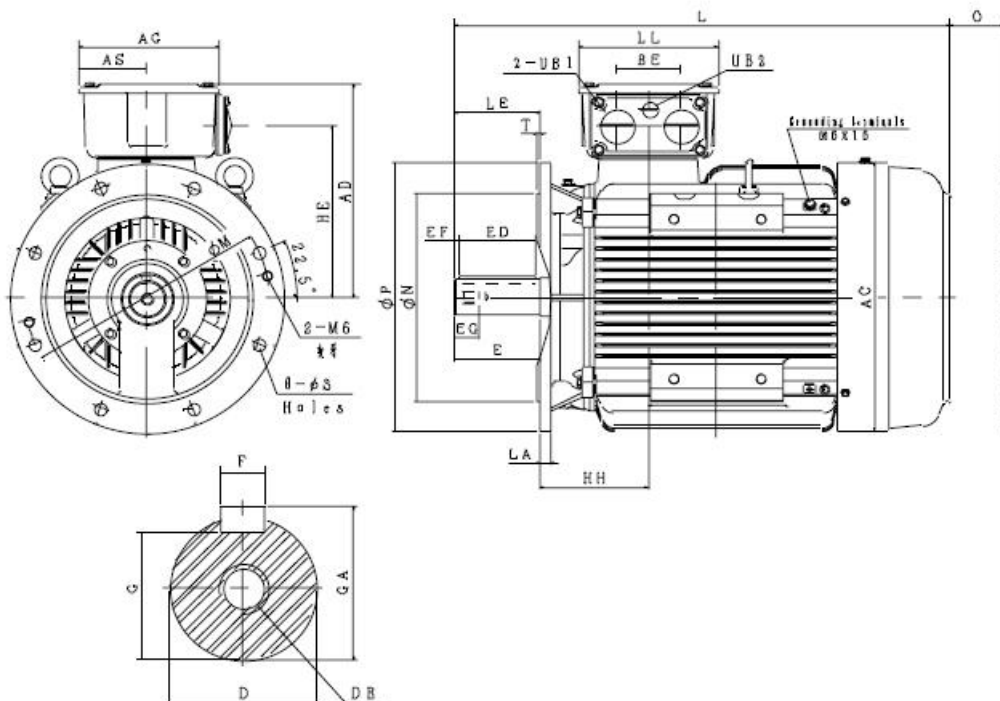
Outline drawing of cast iron design, flange version, mounting B5, frame size 225 - 250
